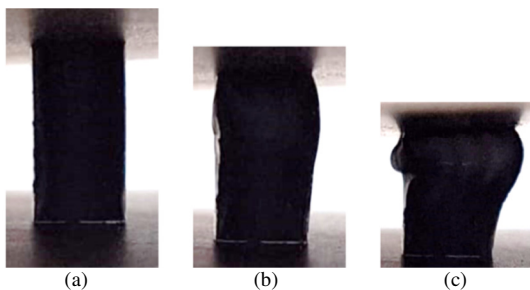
Stages of deformation following the compression test on the additively manufactured specimen by FDM from rPETG: (a) specimen before testing, (b) start of deformation, (c) final deformation.
